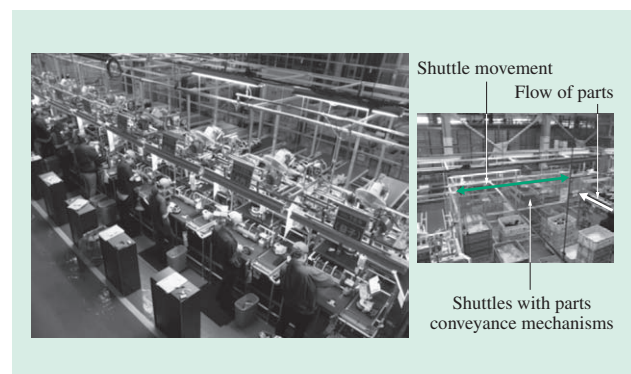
Vacuum Cleaner Chassis Assembly Cell.
